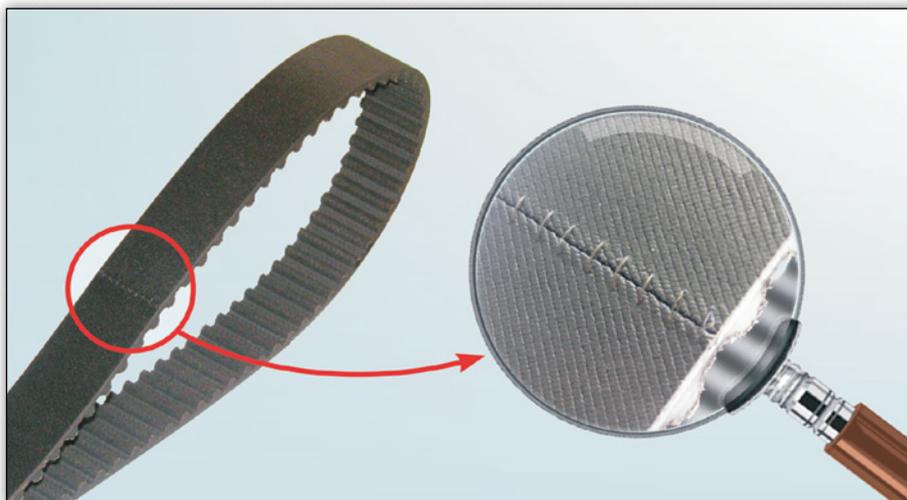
Detailed view of the seam on the fabric backing – this is a basted seam
